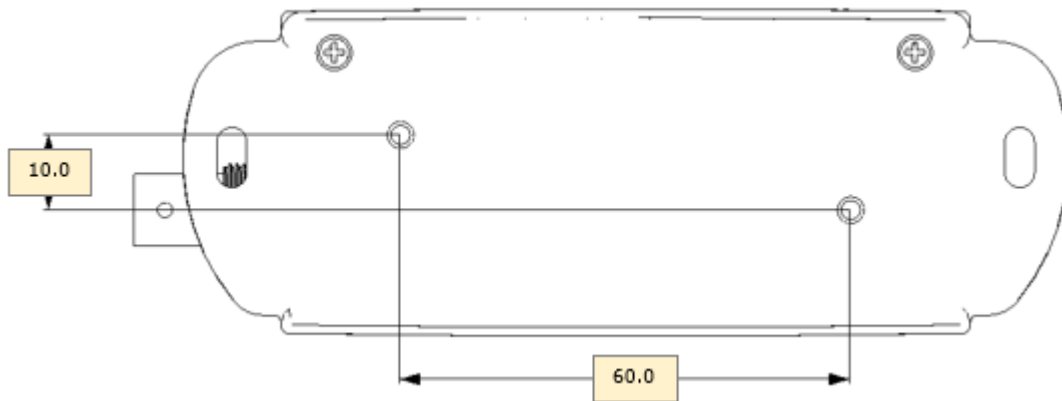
LDSBus pH Sensor Adapter Dimension – Bottom View
